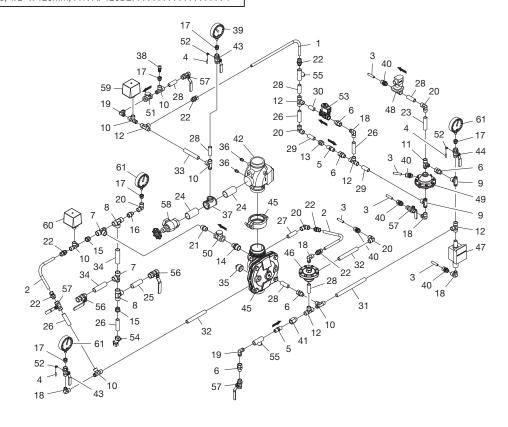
(3 OF 6) DN80 DV-5 PREACTION TYPE A TRIM ASSEMBLY EXPLODED VIEW
